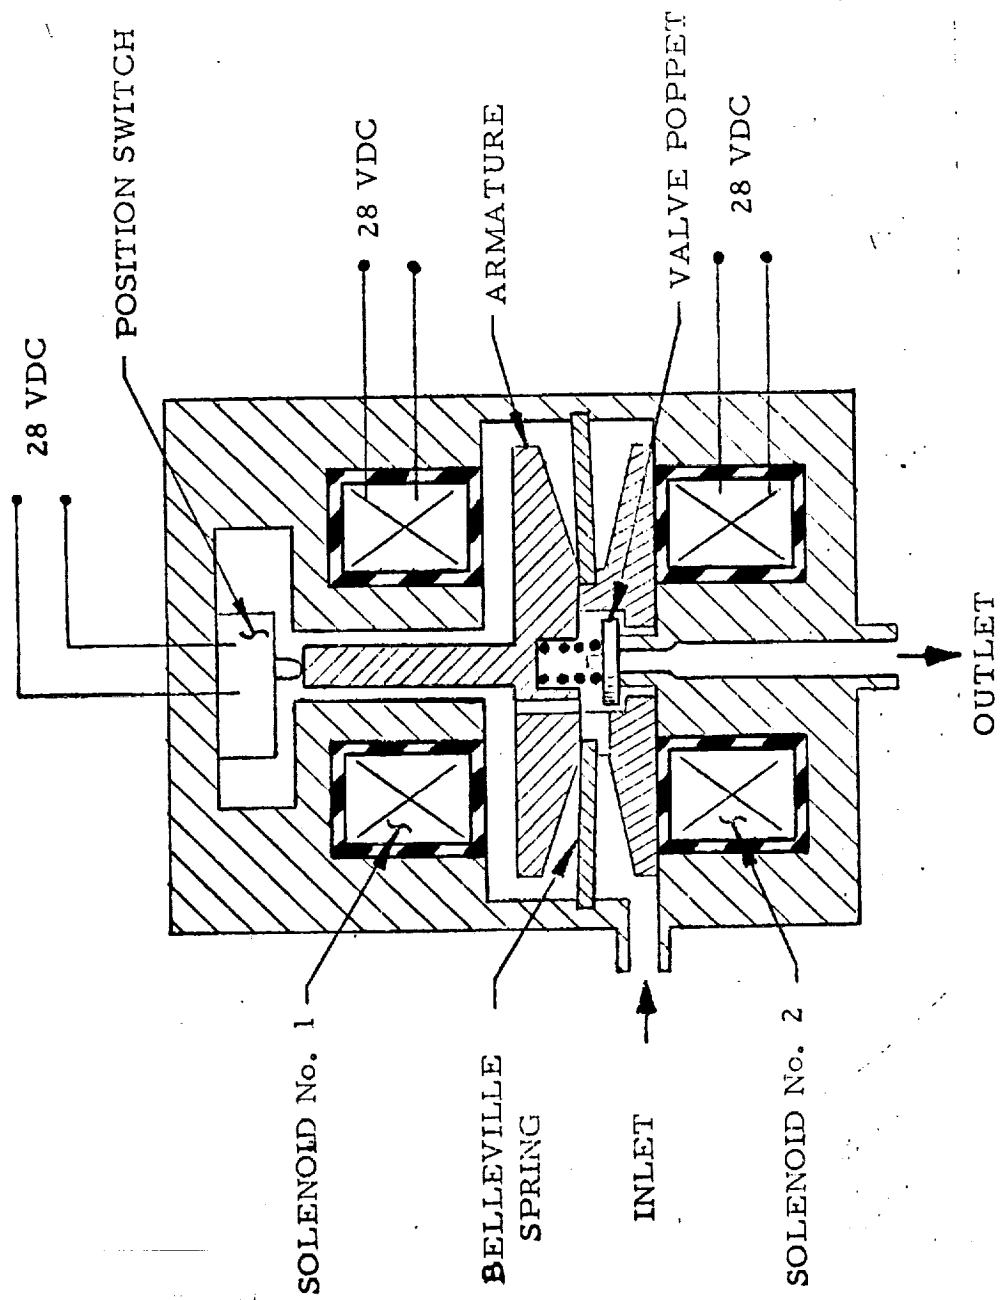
Schematic Diagram of a Latching Solenoid Valve
